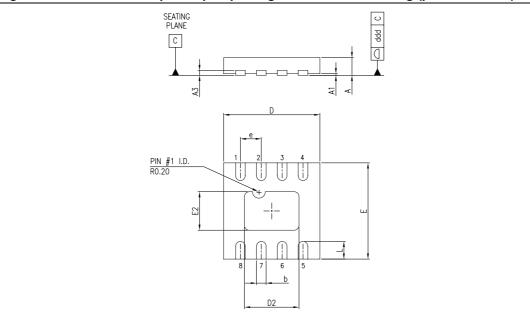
DFN8 3 x 3 exposed pad package mechanical drawing (pitch 0.65 mm)
